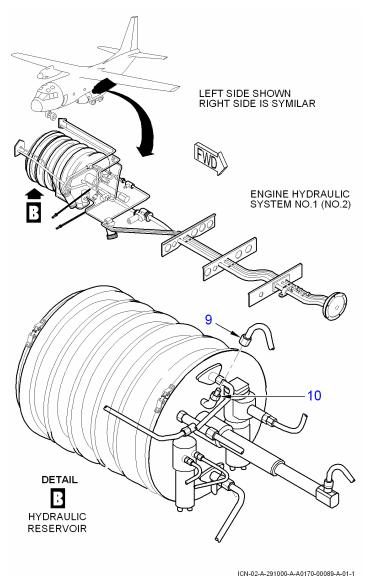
Bleeding Hydraulic System - Bleed (sheet 2/2)
